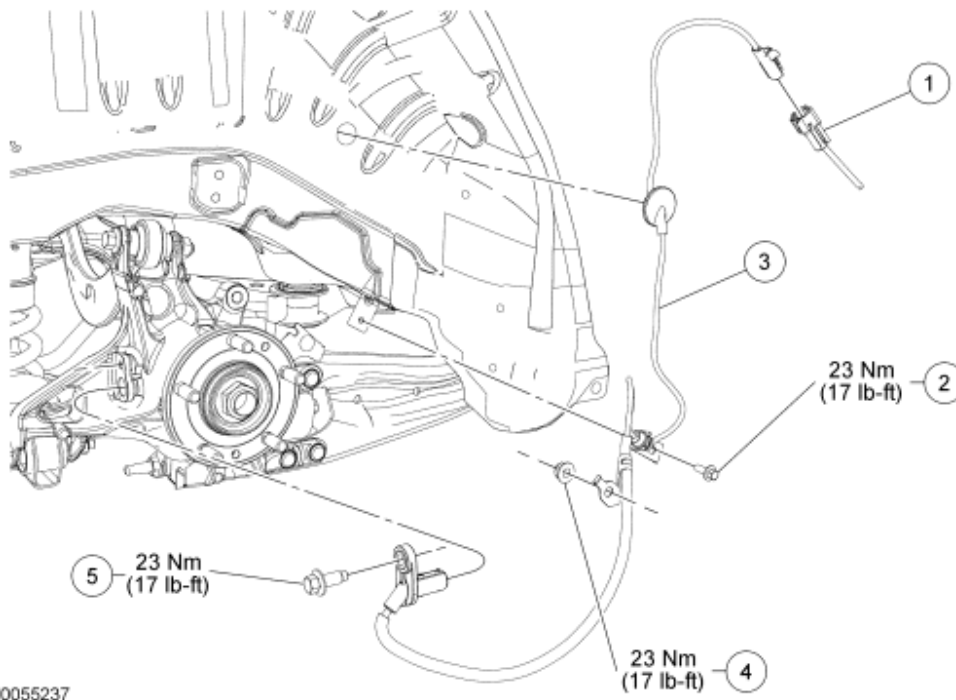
Exploded View Of Rear Wheel Speed Sensor With Torque Specifications - All Wheel Drive (AWD)
